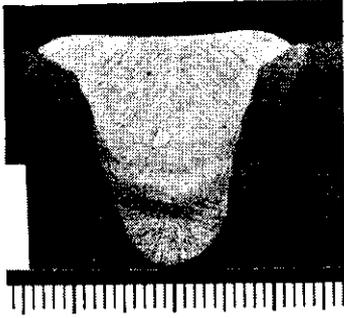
Bead shape of 4° downward welding with V-groove
